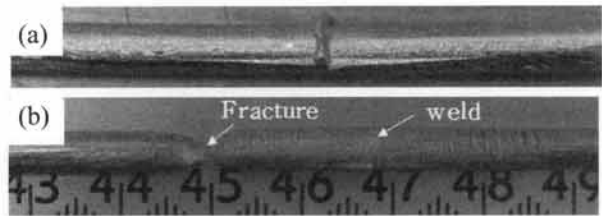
Welded sample. (a) welded sample, (b) tensile tested sample.
